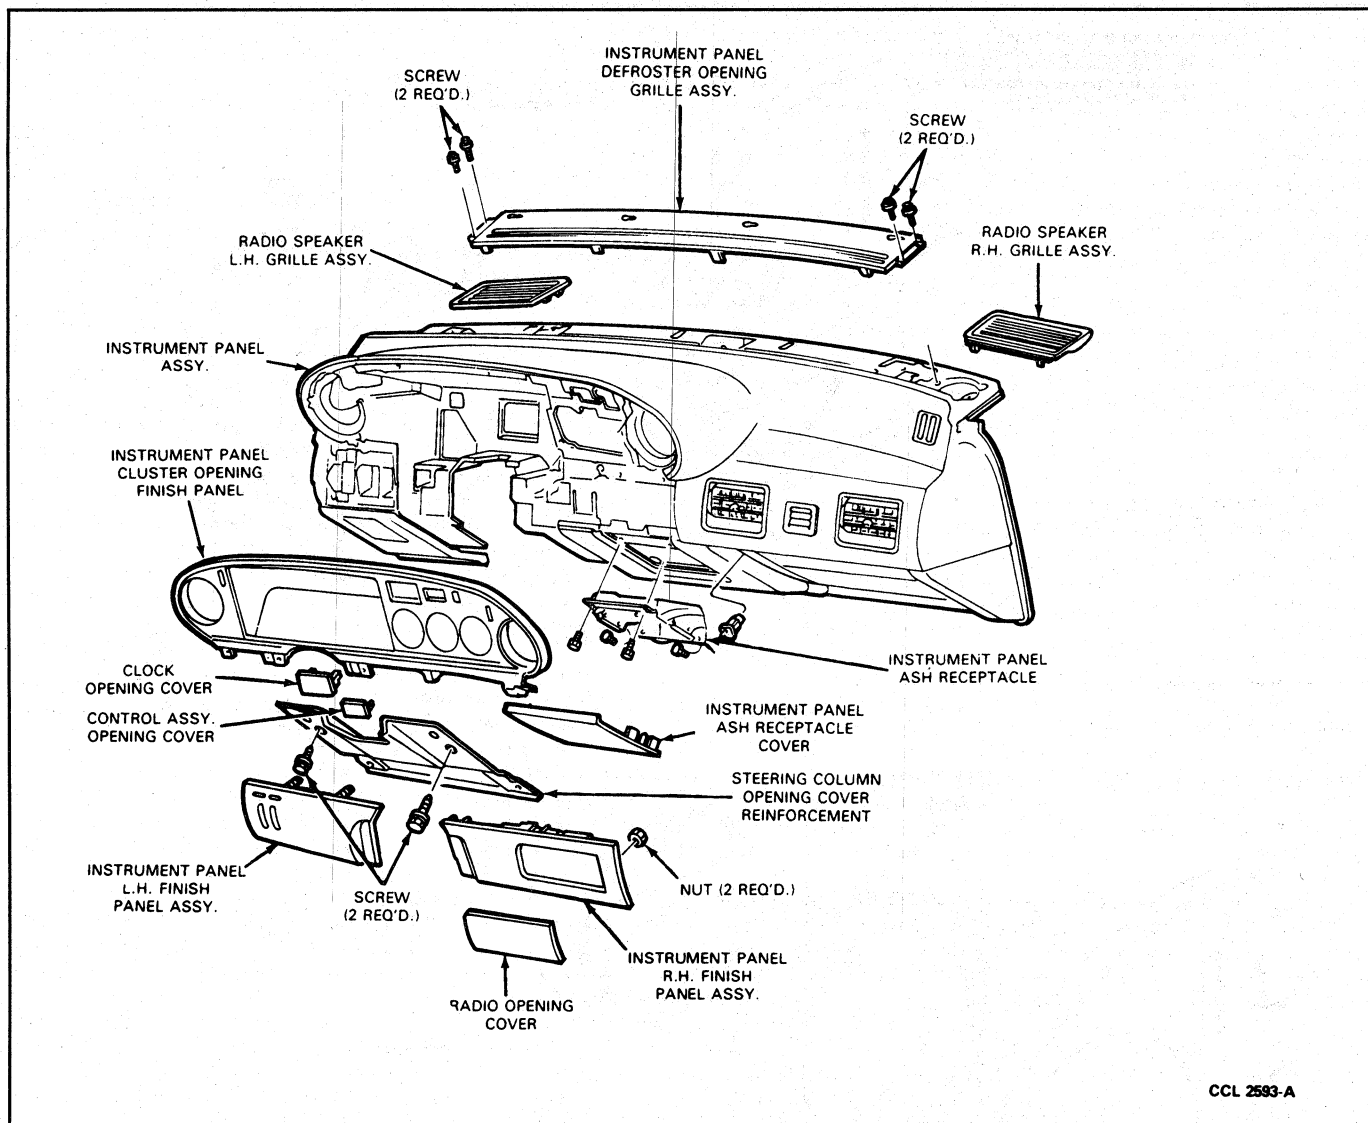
Instrument Panel Assembly, Sable—Disassembled View
